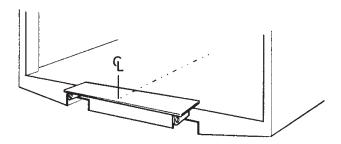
Measure and mark the midpoint of the rear beam of the vehicle. Bolt or spot-weld the mounting jig to the rear beam
